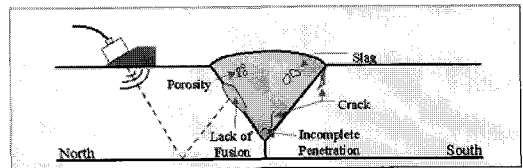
Weld inspection geometry and description of the flaws
